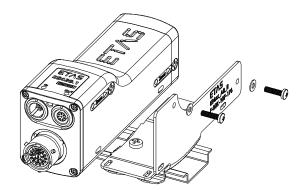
Fastening on DIN Rails with Additional Screws
